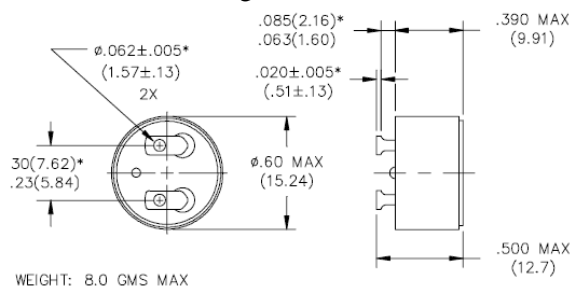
Honeywell 700 series layout (dimensions in inches)
